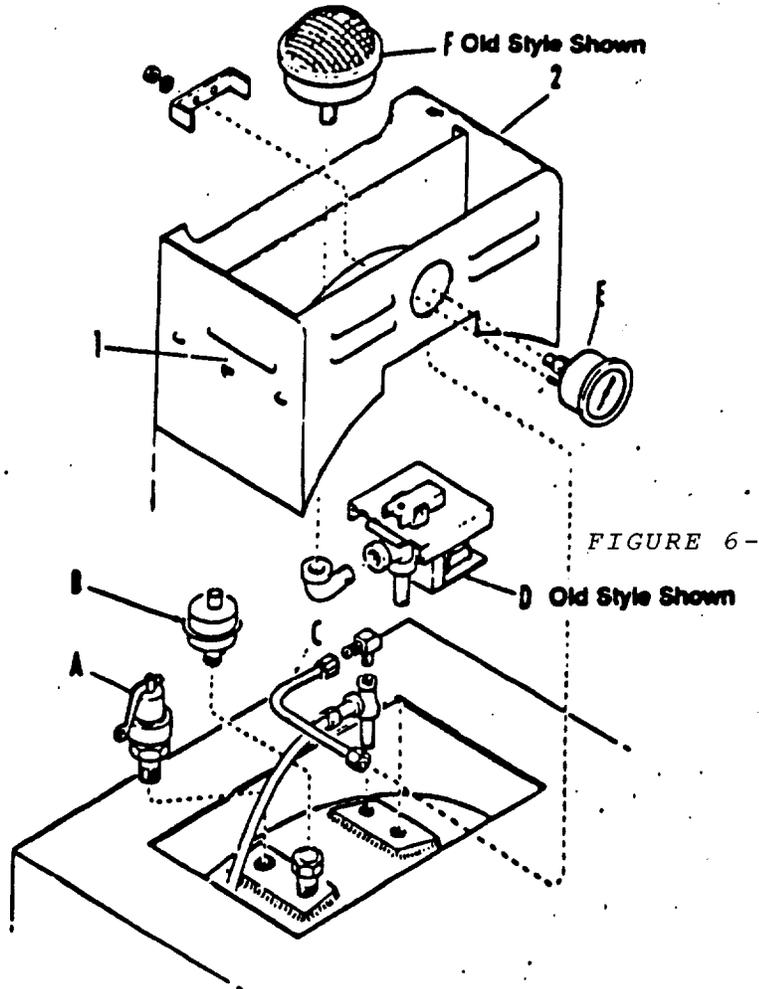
VALVE SAFETY OLD STYLE SHOWN
